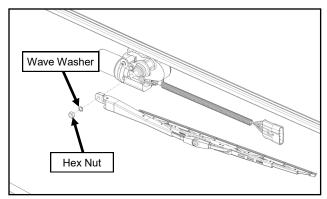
(Install Wiper Arm onto Wiper Motor)
